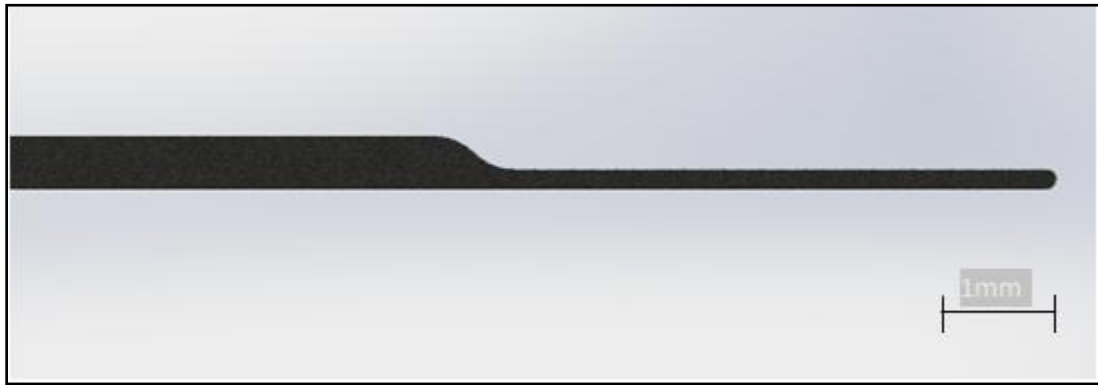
Final Doctor Blade Design (Cross Section of Lamella View)
